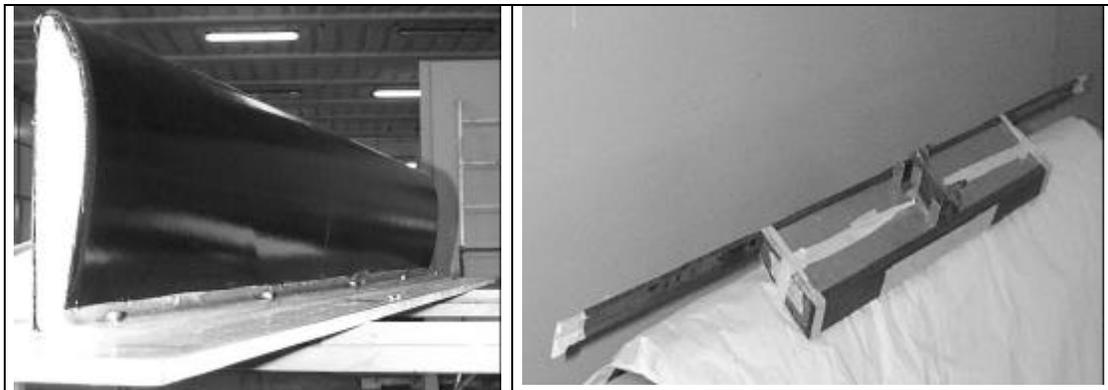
Wing Skin after curing cycle on male tool and wing box beam assembly
